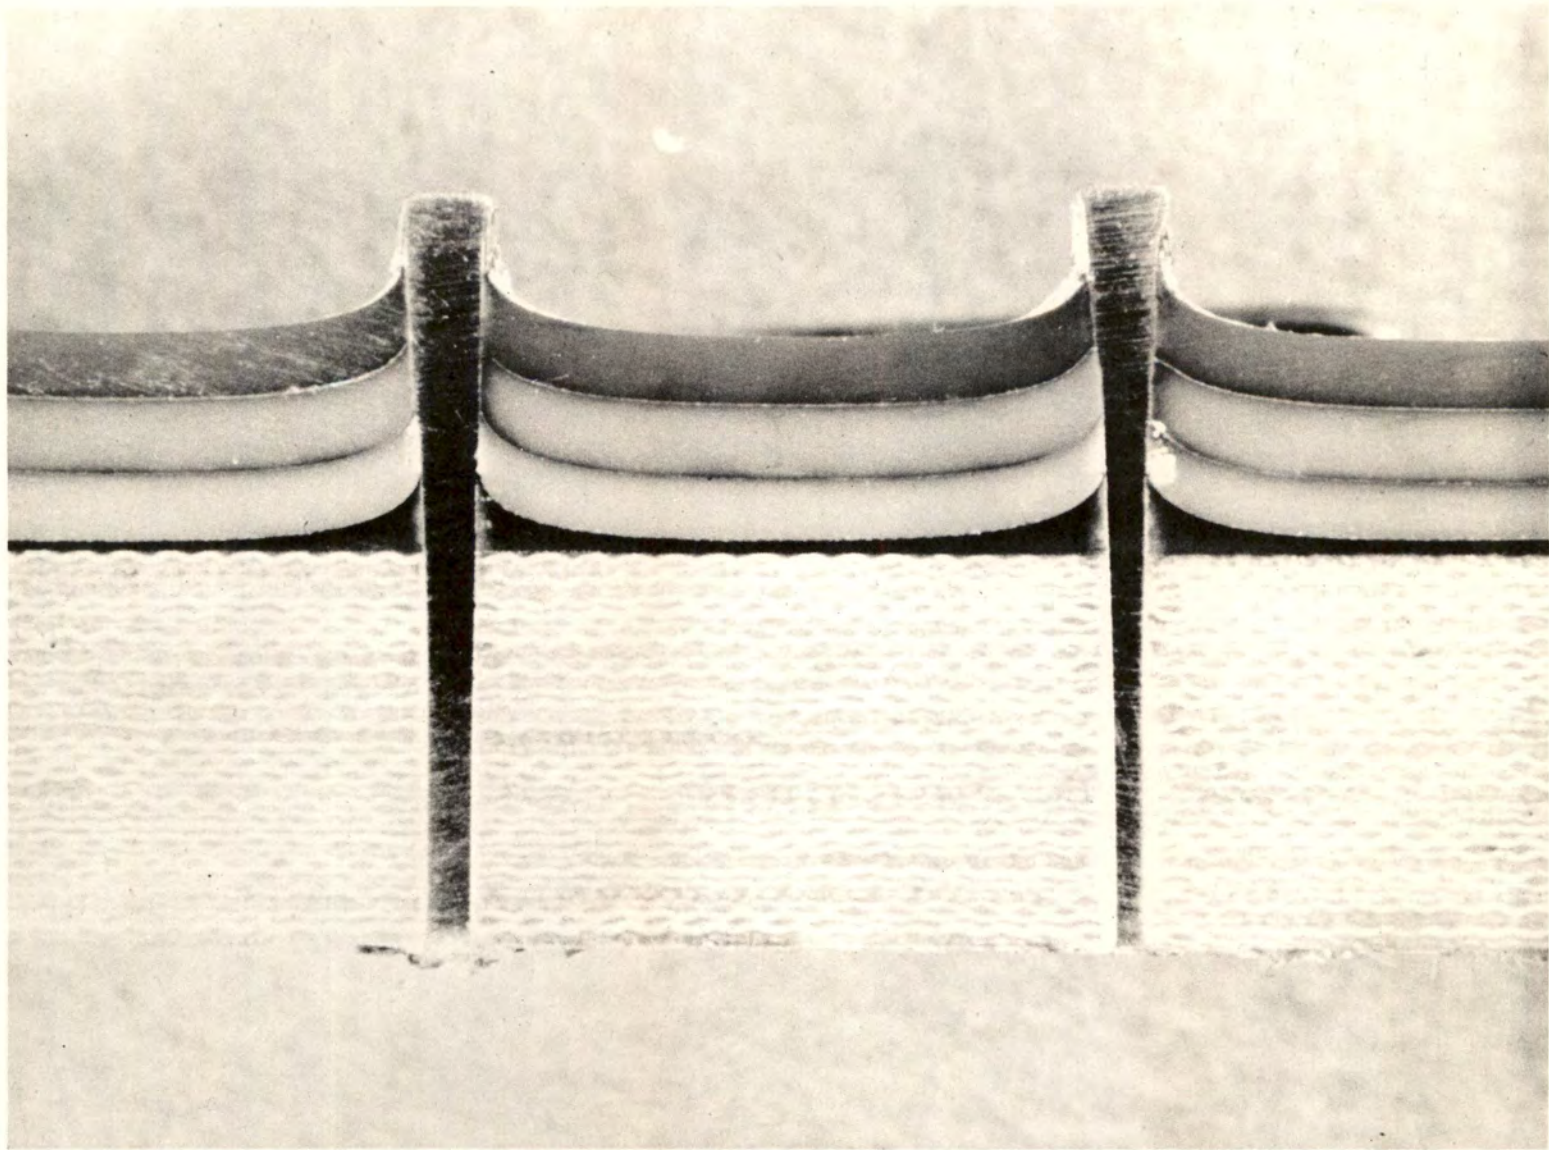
Section view of multi-layer deposited wiring with plated connections to copper pins 0.5 inch apart.
